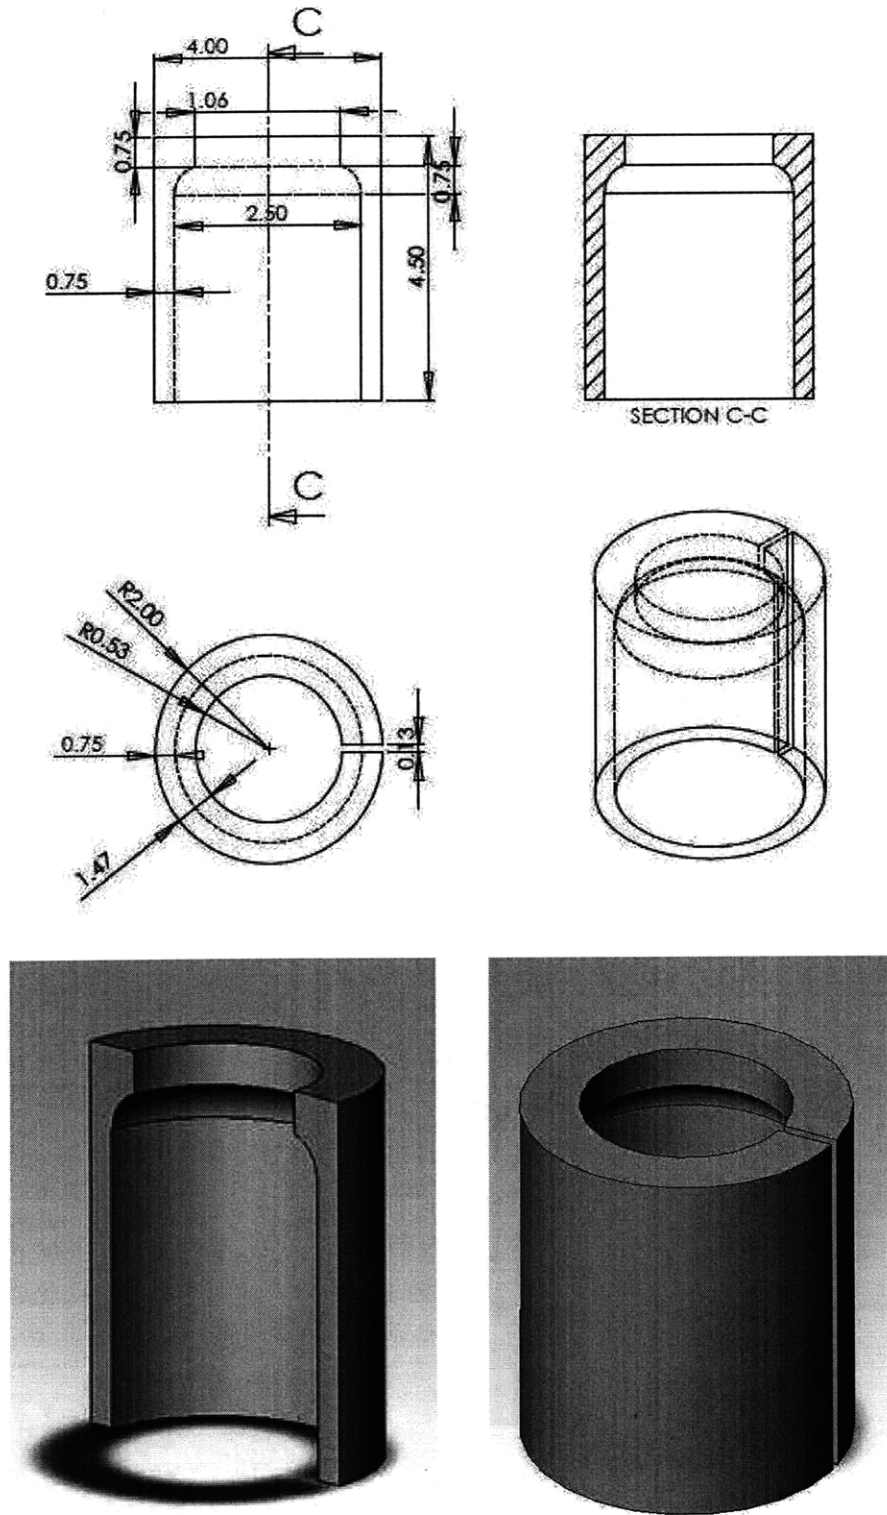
Solidworks Drawings of the design of the manufactured fieldshaper at MIT.
